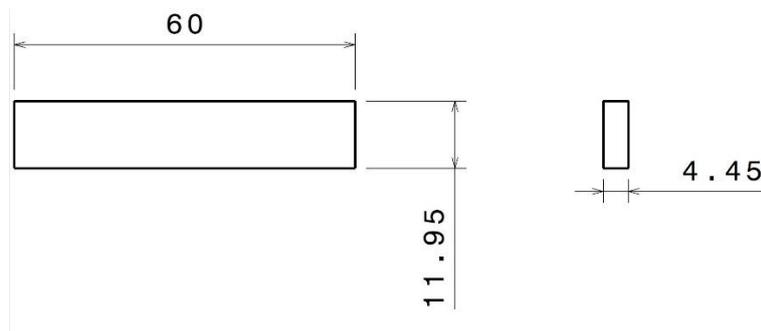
Dimensions of HDT specimen (in millimetres).
